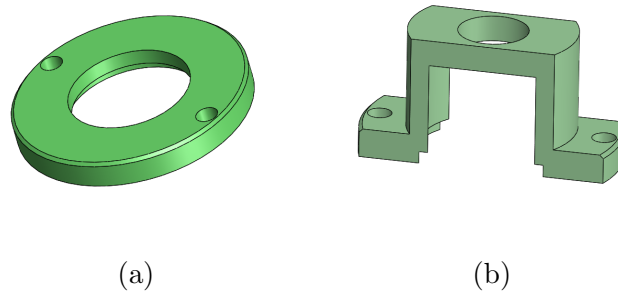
Illustrations of two types of bearing housings in the knee joint: (a) the bearing housing C to fix the potentiometer at the outside thigh rail and (b) the bearing housing D to clamp the ball bearing at the inside thigh rail.
